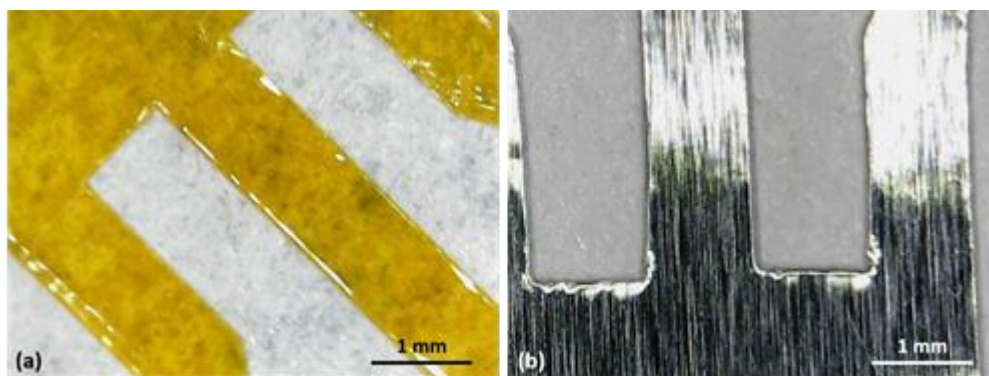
Images of tapes after cutting with a Silhouette craft cutter. (a) Kapton (b) Aluminum [Coskun et al., 2022].
